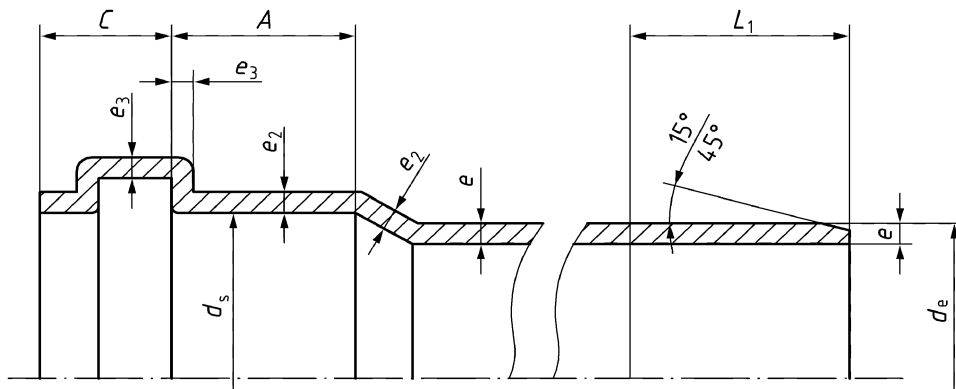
General dimensions of sockets with elastomeric ring seal joints and spigot ends with elastomeric sealing joints
